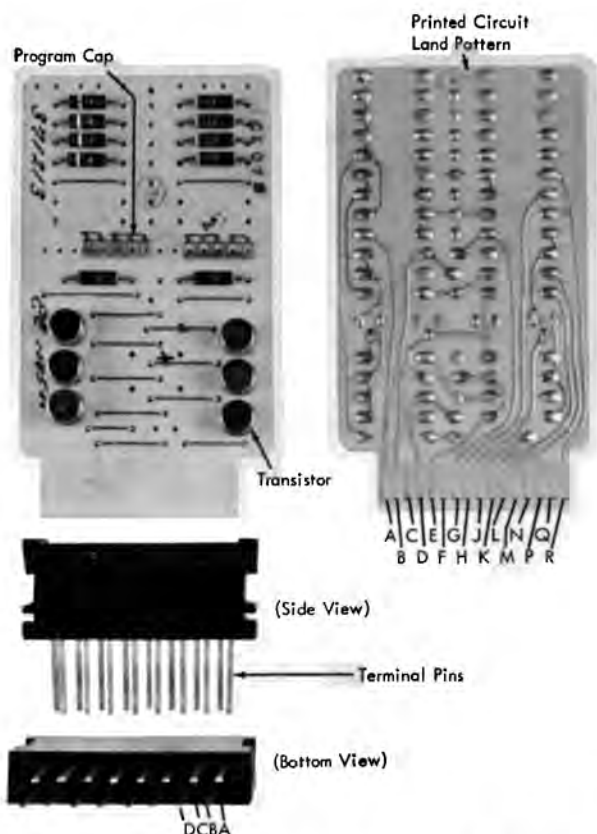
SMS Printed Wiring Cards (Single Card and Socket, and Double Card)
